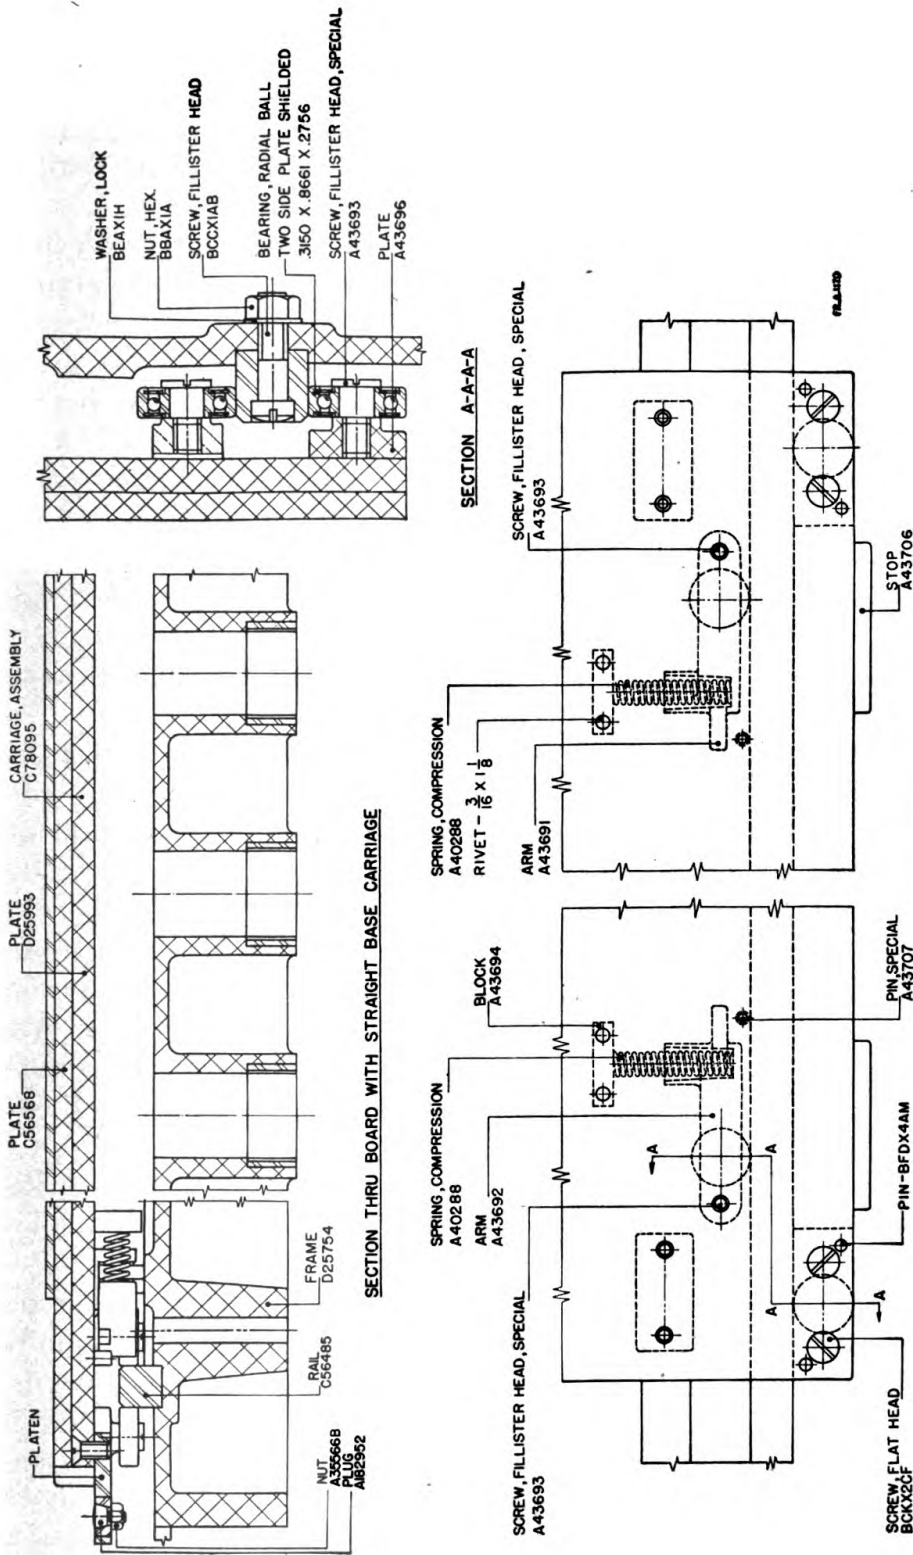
Sound ranging plotting board M1, sectional views.
